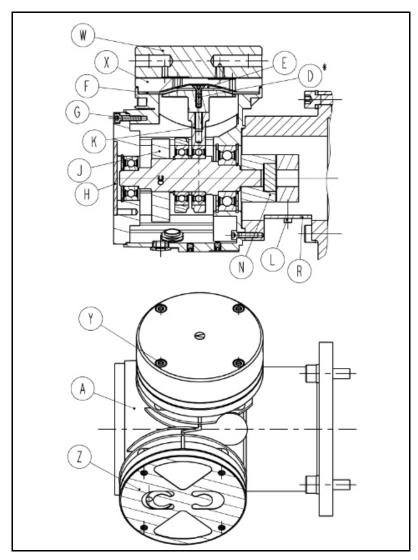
Pump parts for double-head versions with stainless steel head *not for .9 versions
